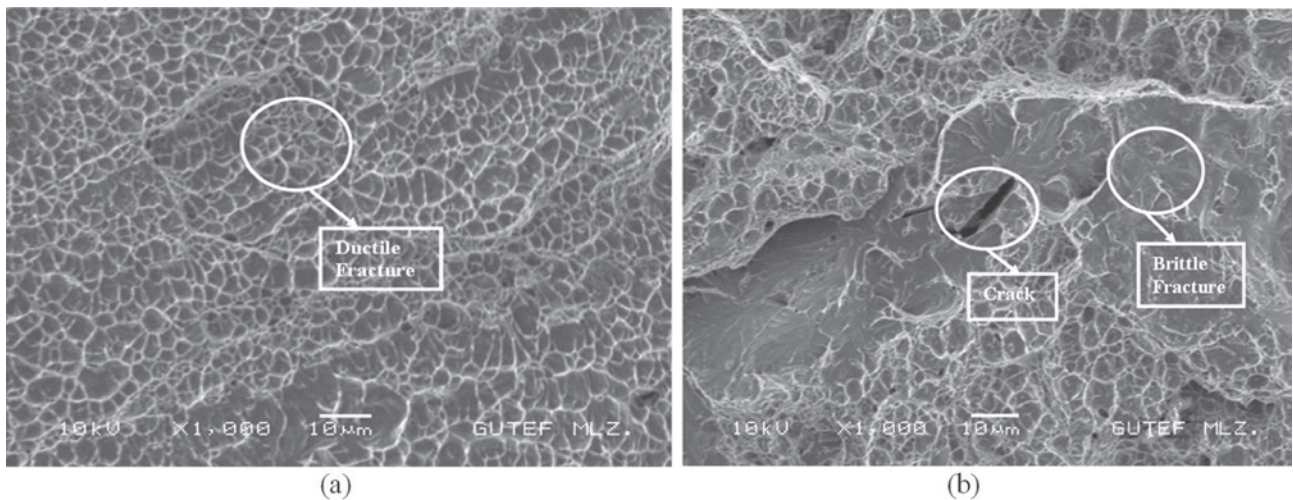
FESEM images of the tensile fracture surfaces of (a) sample 13 and (b) sample 8
